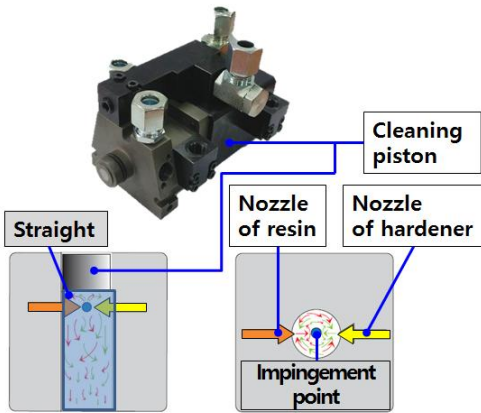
Schematic process drawings of high-pressure resin transfer molding method^[14]
